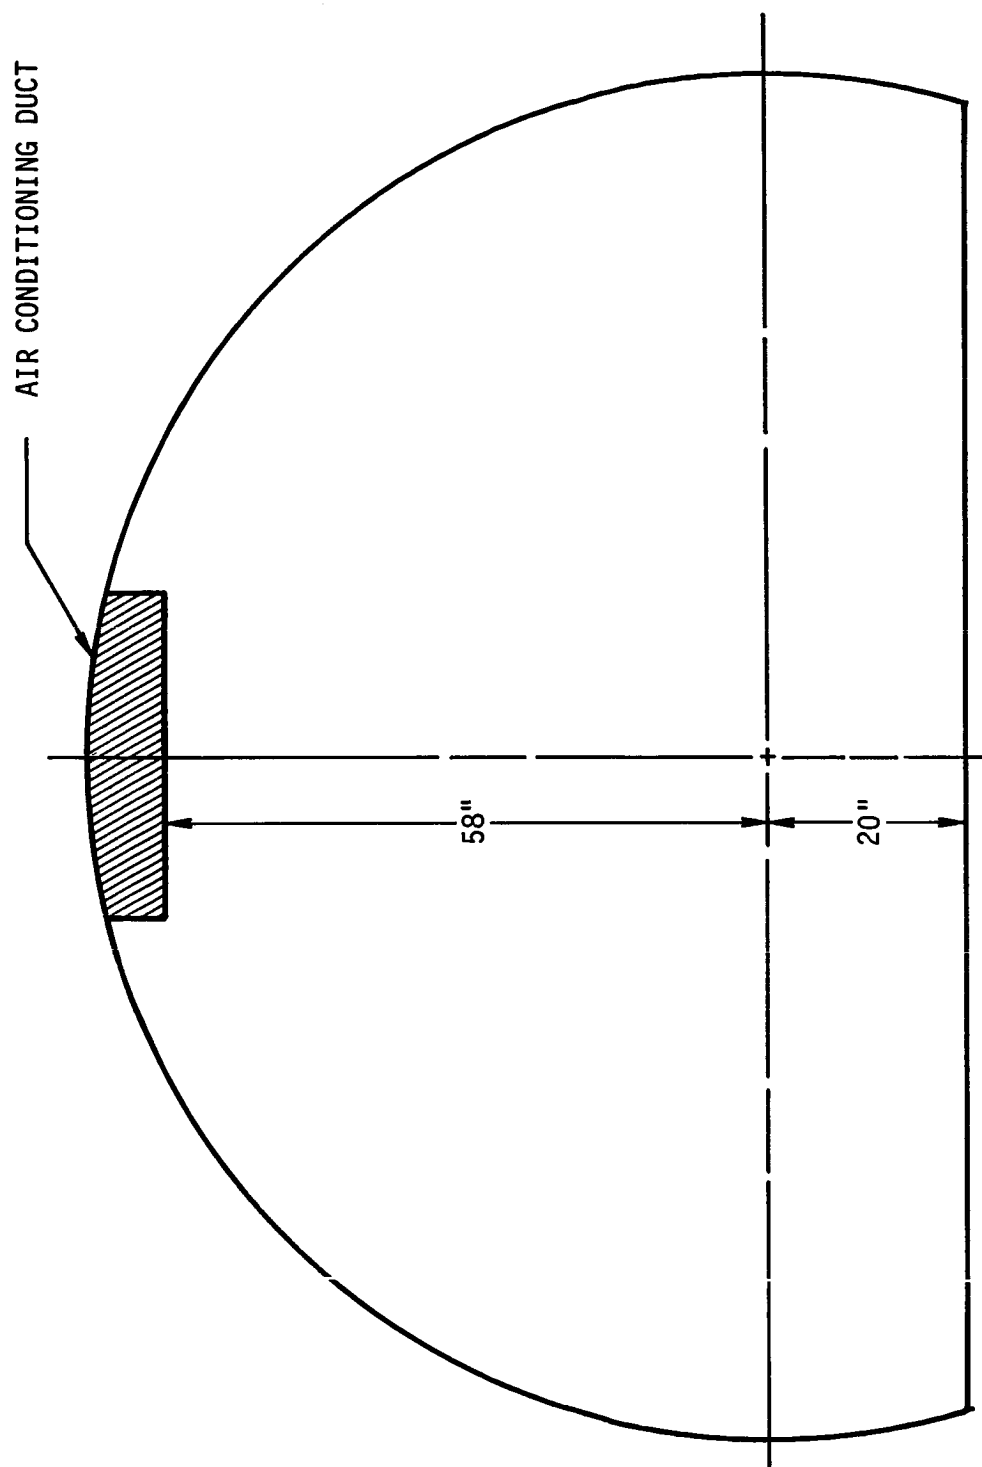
Cross Section View of KC-135 Station 630 (Looking Forward)
